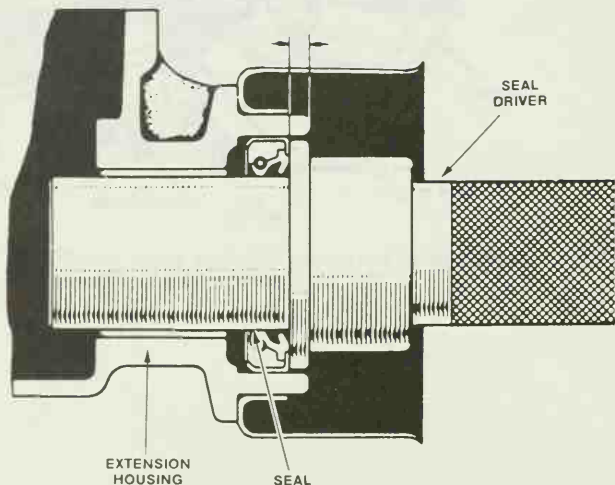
The new seal is installed by driving it into the extension housing with a seal driver.
